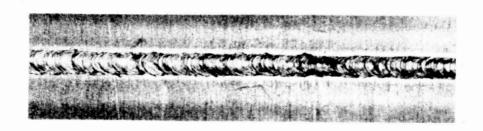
Electron Beam Weld in T-222, Top View. 7X
